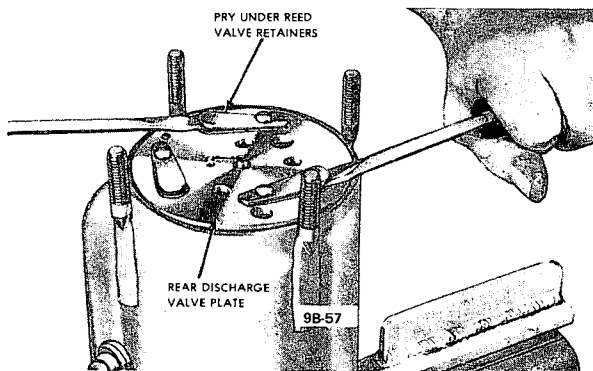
B-82 Removing Rear Discharge Valve Plate - 6 Cylinder Compressor
